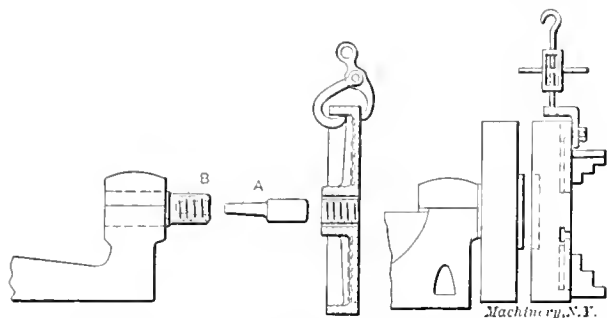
Appliances which Facilitate placing the Face-plate on the Lathe Spindle.
